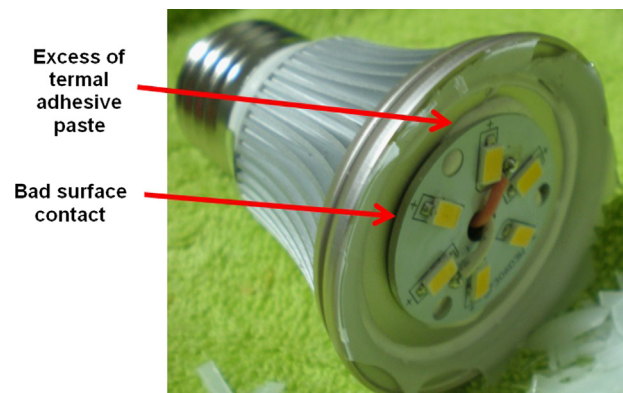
Example of bad contact assembly procedure of a LED PCB with the bulb heat sink.
